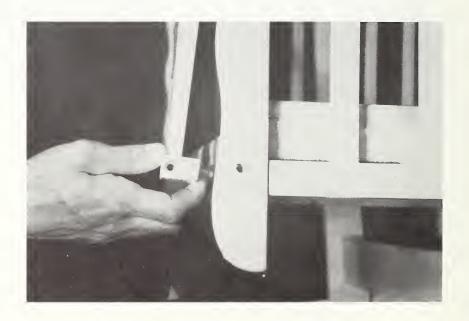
Gap between the mattress support and the crib side of crib No. 6 produced by a small horizontal force. The mattress support and crib end could not be joined because of screw hole misalignment.
